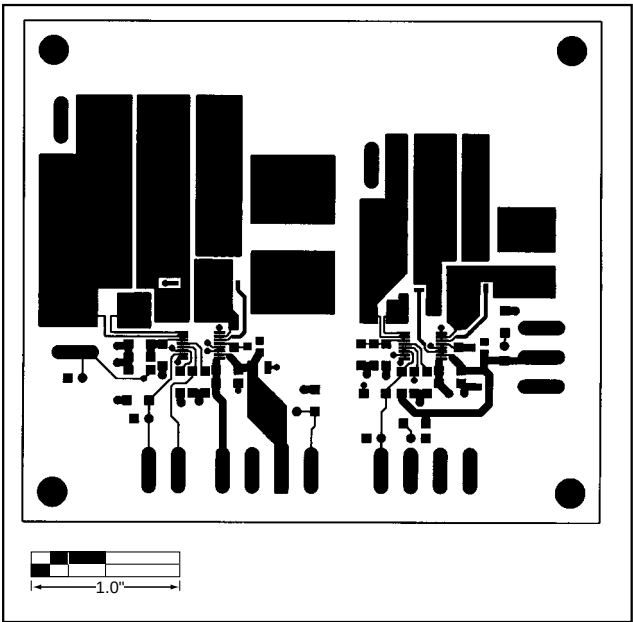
MAX1637 EV Kit PC Board Layout—Component Side
